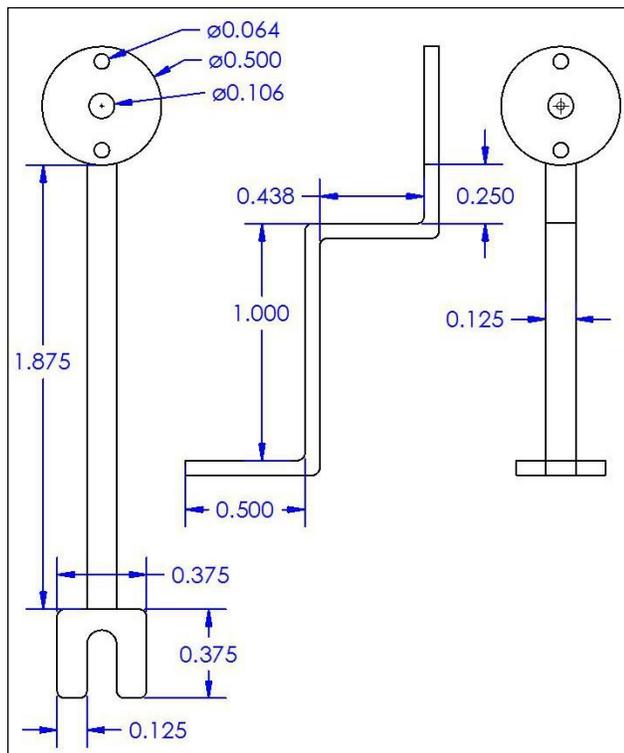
Construction drawing for the crutch. Cut out the part according to the dimensions shown on the left drawing and then bend to the shape shown in the center and right drawing. Note: The crutch shown here was built to test the escapement. An adjustable crutch will be built with the pendulum. Refer to that section for the final crutch design.
